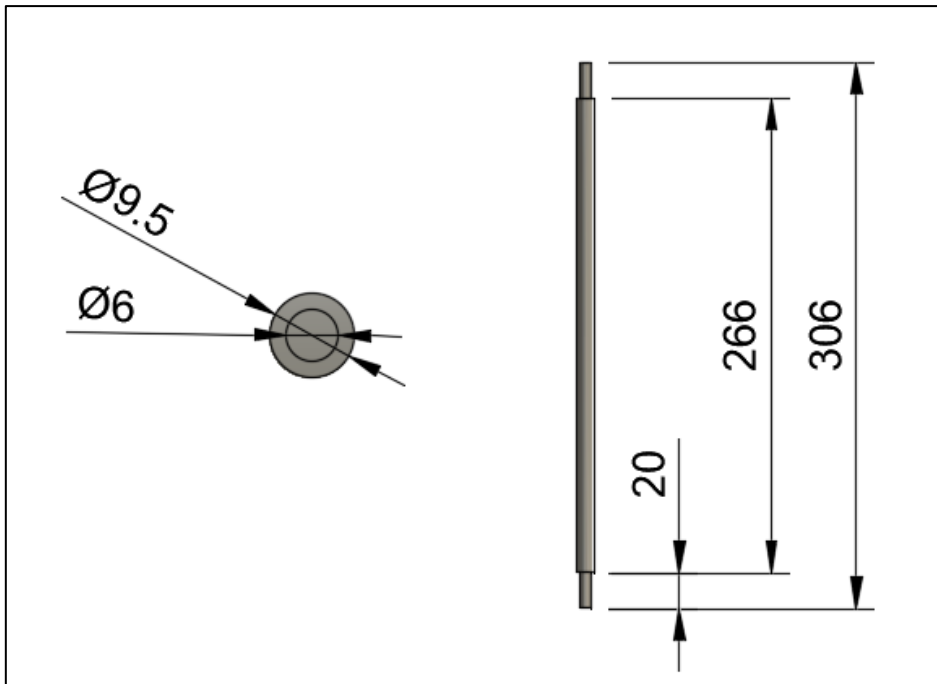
Technical Drawing for the Spacers in Station 1 (mm).
